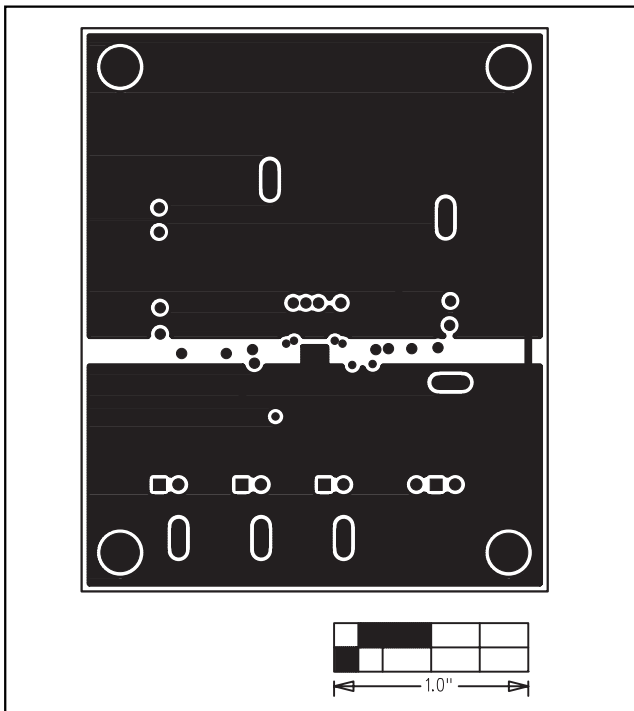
MAX1536 EV Kit PC Board Layout—Layer 2 (PGND and AGND)
